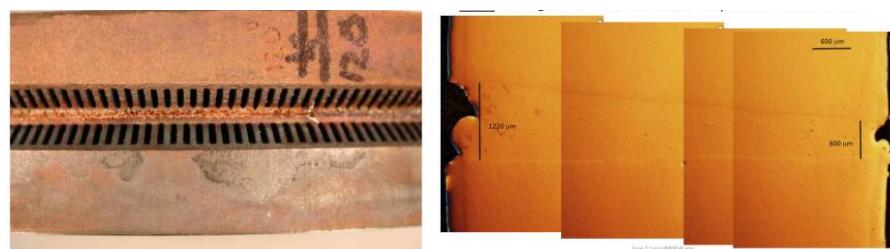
Chamber Halves Joint Trial EB Weld.
